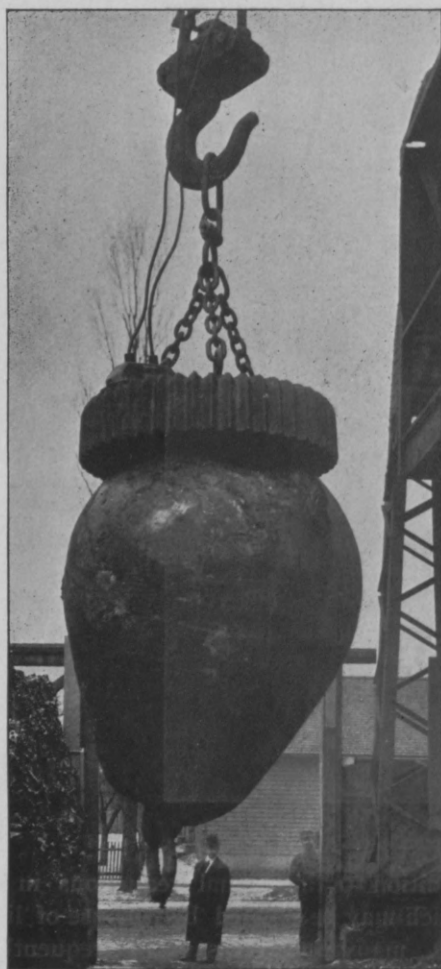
Lifting a 12,000-lb. Skull Cracker with a Magnet.
